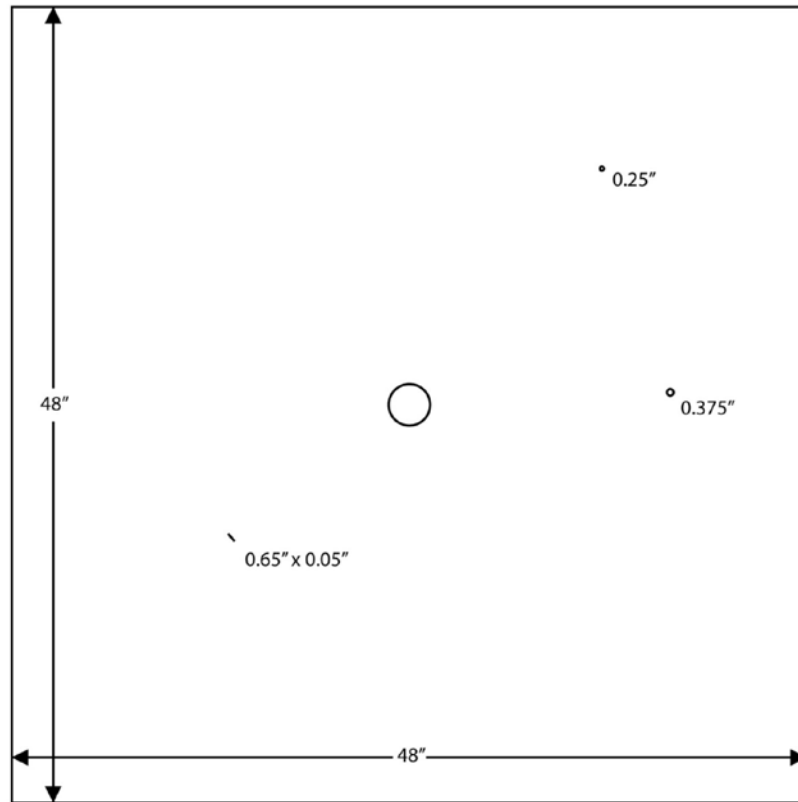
Drawing of the test panel used for couplant method comparison testing; the panel includes three manufactured flaws: two holes and one notch.
